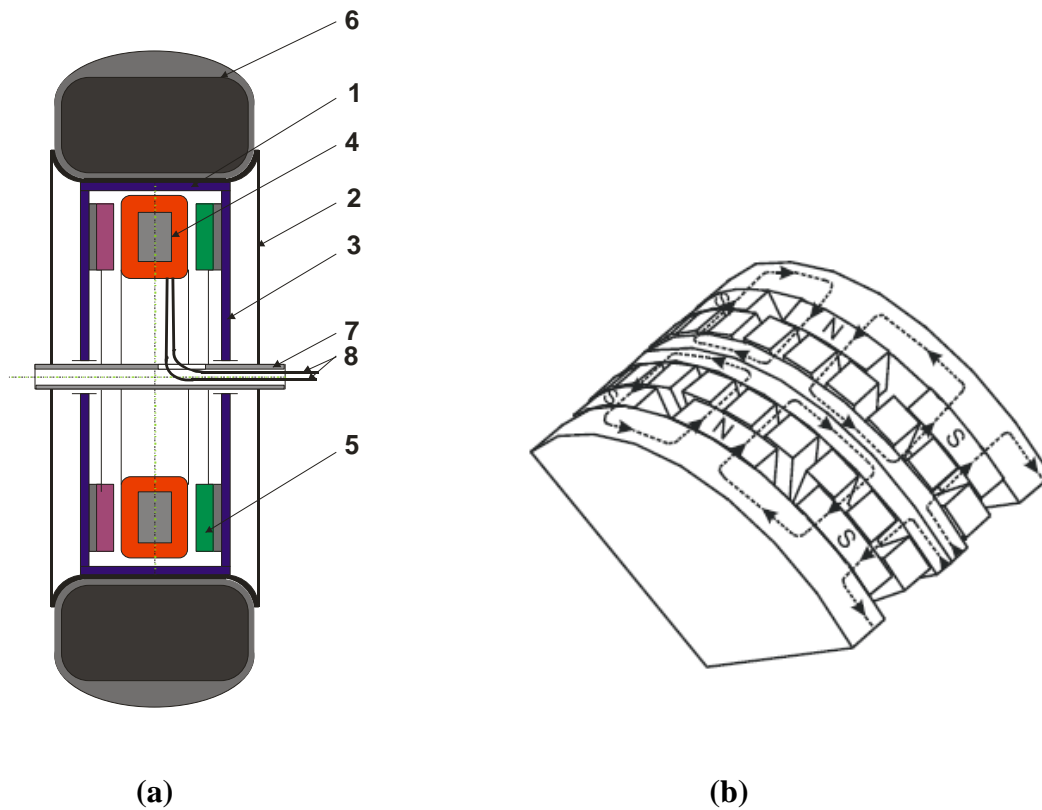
Torus motor: (a) Applied as hub drive: 1 - motor, 2 - wheel rim, 3 - rotor, 4 - stator, 5 - permanent magnets, 6 - tire, 7 - wheel axle, 8 - supply leads, (b) Flux distribution
